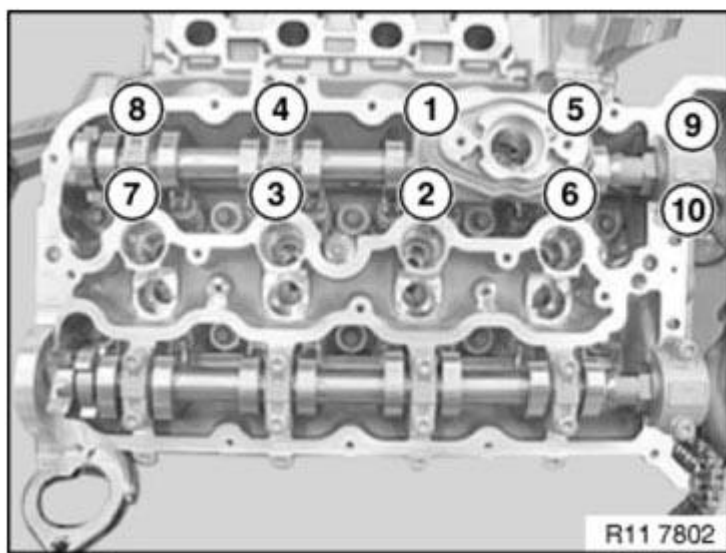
Identifying Camshaft Bearings Bolts Tightening Sequence
